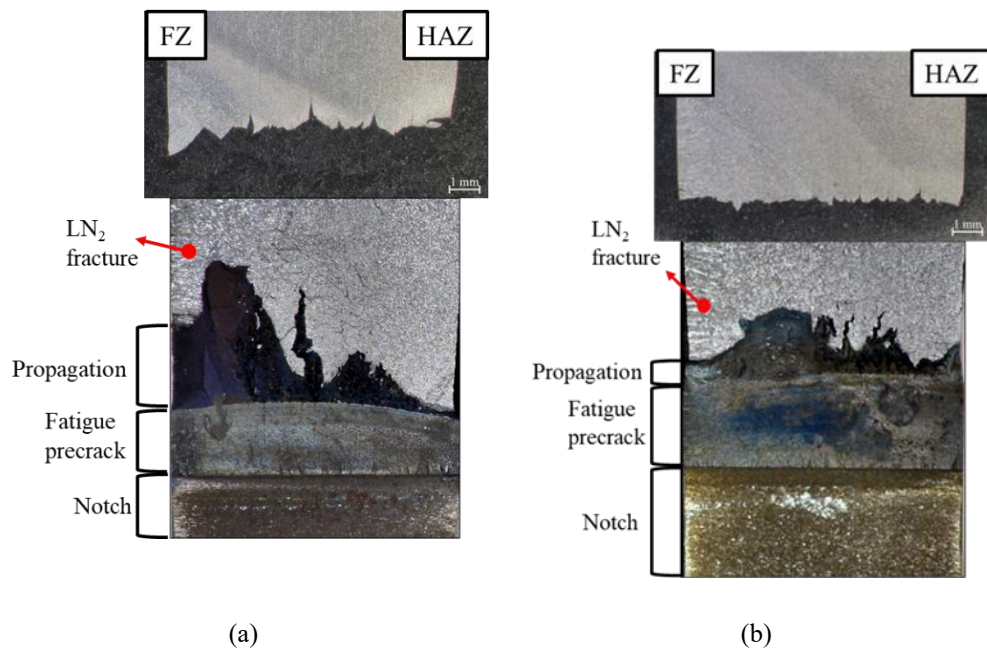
(a) HAZ1 NP air tested specimen and (b) HAZ3 NP H tested specimen with the macrograph on top and the fracture surface below.
